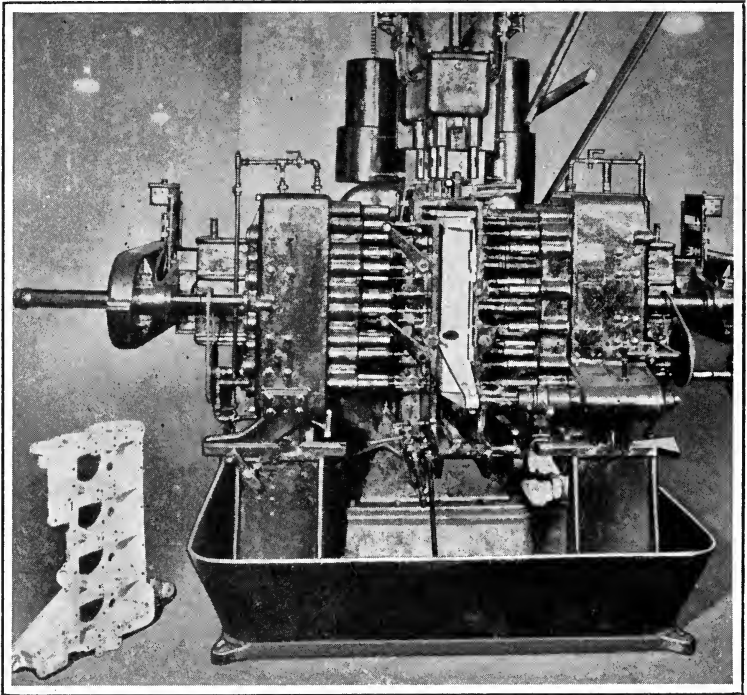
Three-way Multiple-spindle Drilling Machine for Drilling Eighty-four Holes in Automobile Crankcase at One Setting
